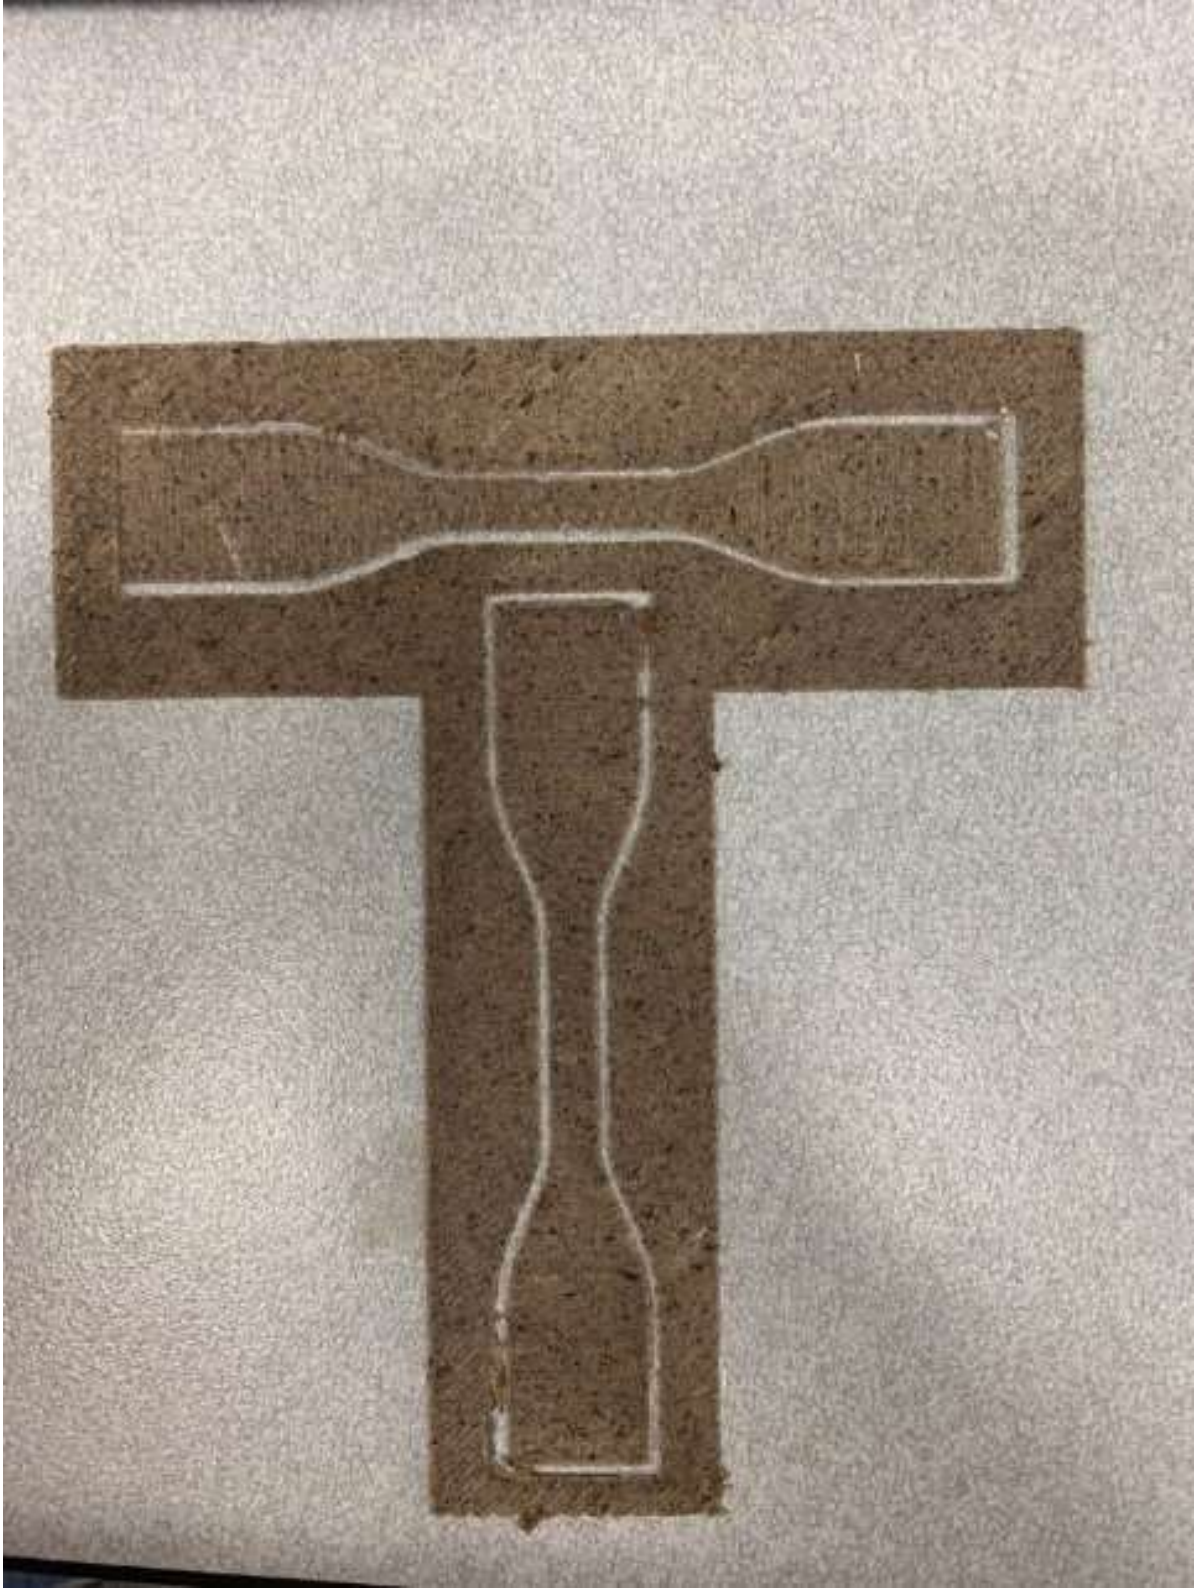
3D printed single layer tensile bars with ABS-SFRC
